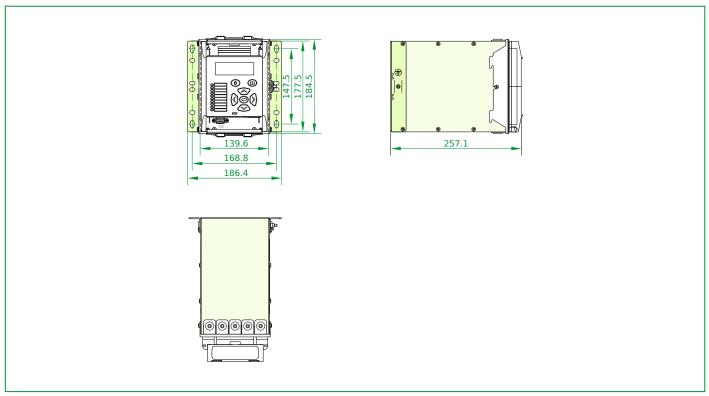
Surface-mounted 24 TE case. (Dimensions in mm.)
